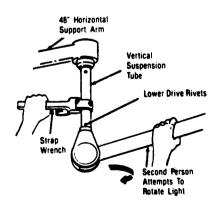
LOWER DRIVE RIVET INSPECTION.
